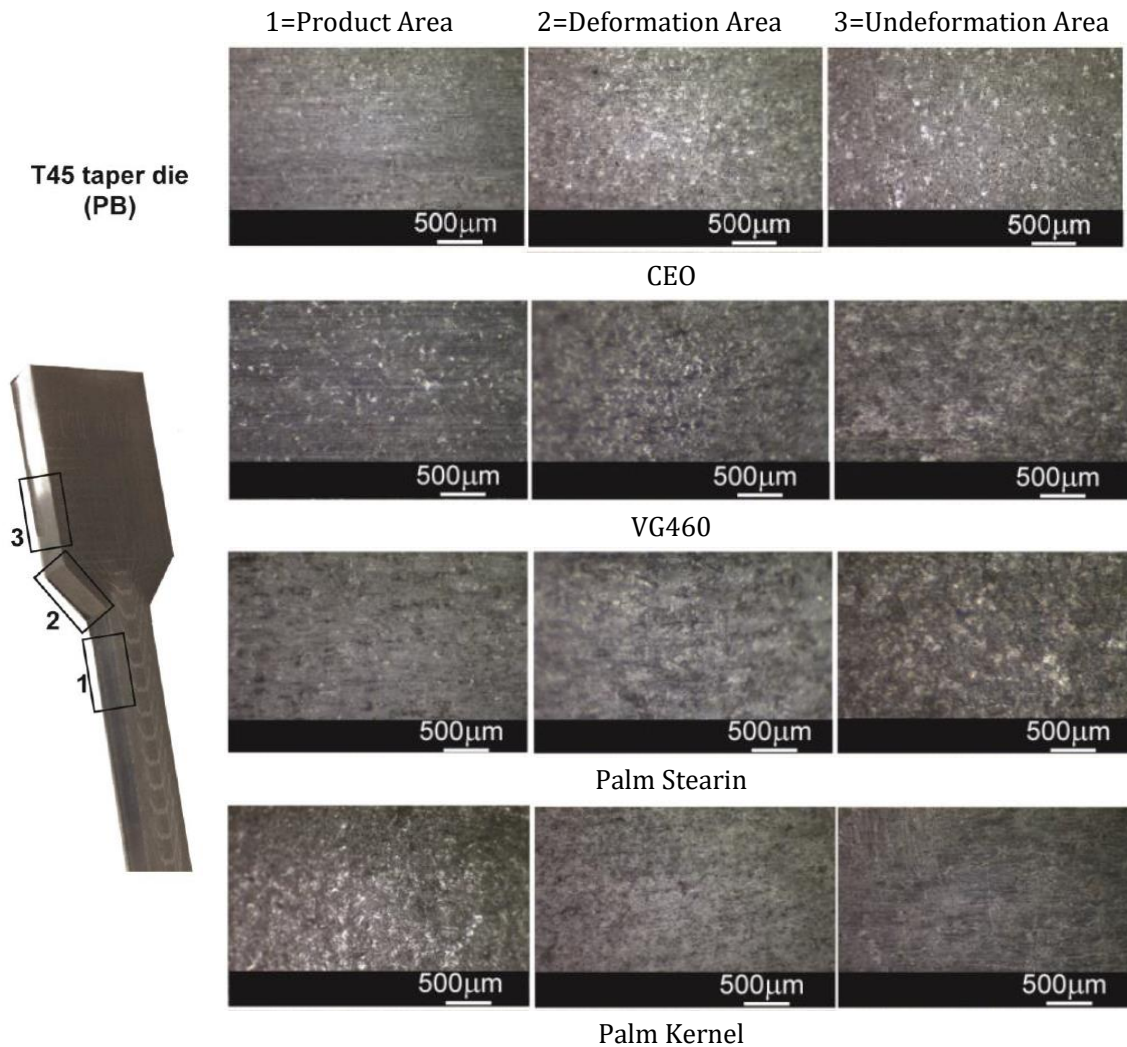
Experimental surfaces of an extruded billets for T45 taper die.
